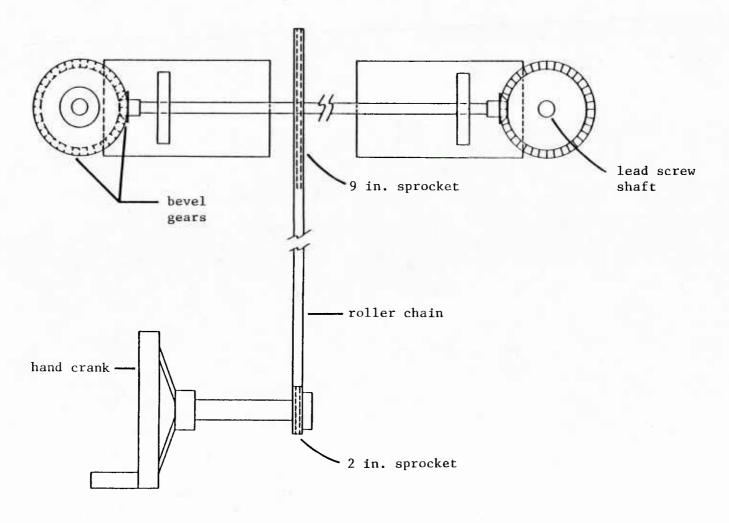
Top View of Mechanical Connection Between Lead Screw Shafts
